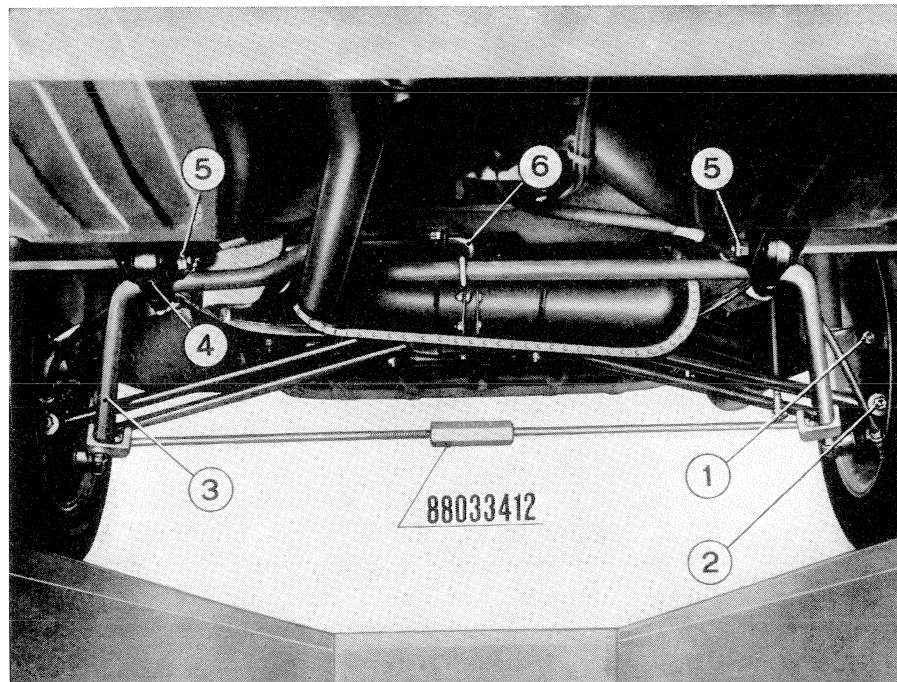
2/13 - Fixture to Remove Rear Stabilizer Bar
